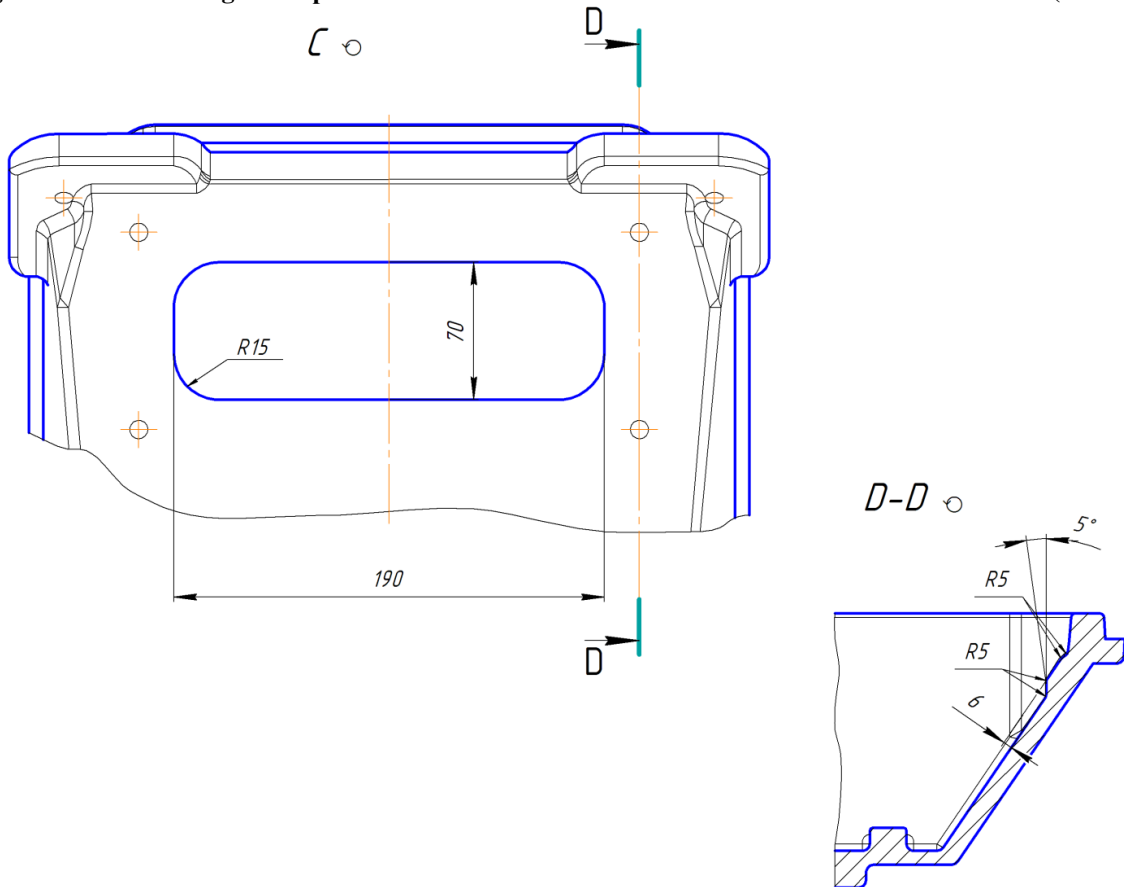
The drawing of the part «Frame of the terminal box 5AMN 315». View C (rotated), longitudinal section D-D (rotated).
